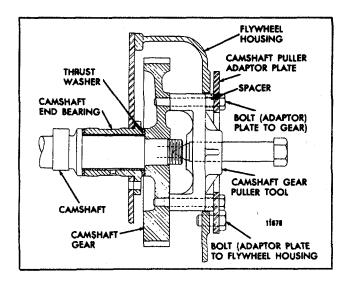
Removing Camshaft with Flywheel Housing in Place
